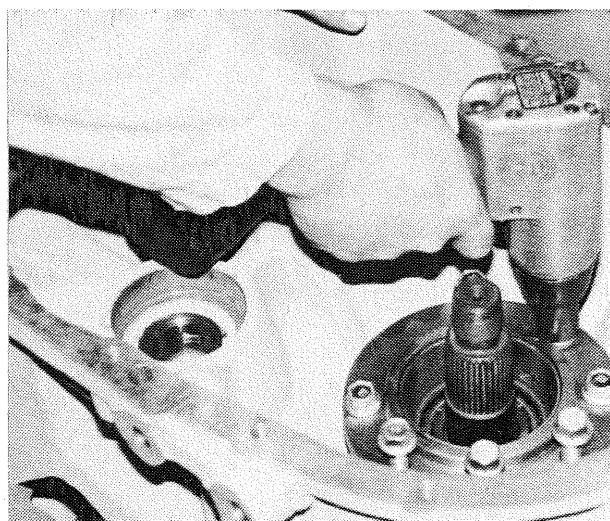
Disassembly of the Gear Train (1 of 2)
